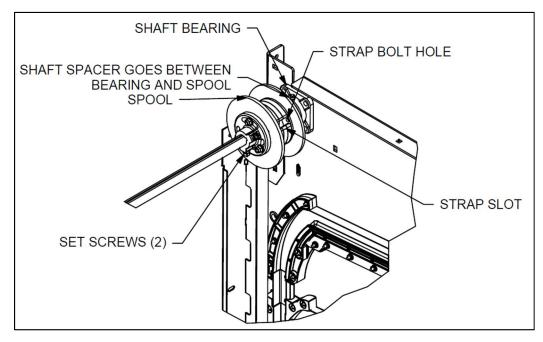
ATTACHING STRAP TO SPOOL – RIGHT HAND BRACKET
